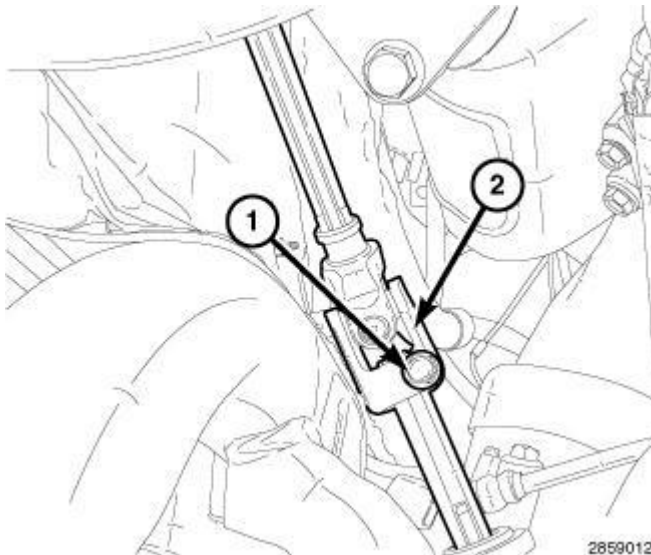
Lower Steering Shaft Coupler & Pinch Bolt
